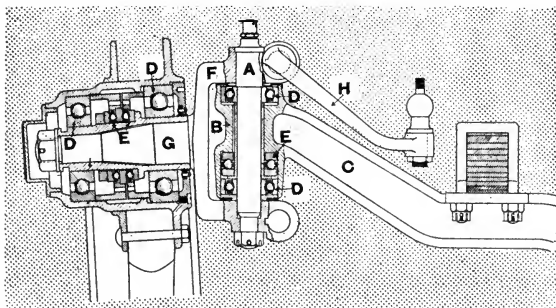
BALL BEARING HUB, FRONT WHEEL.
